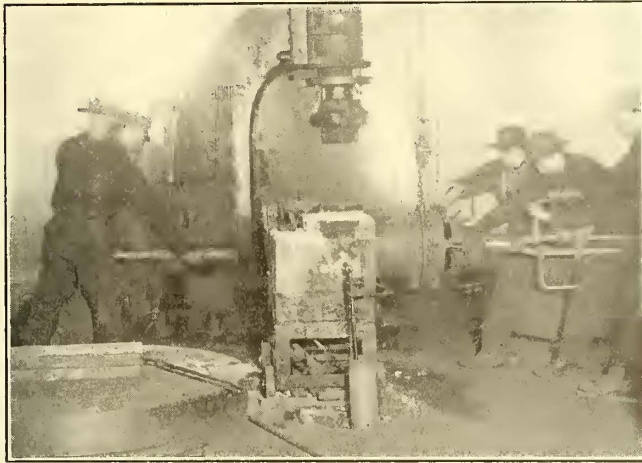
San Francisco Welding—Driving the Shaft Parts Together at the Final Welding Heat
